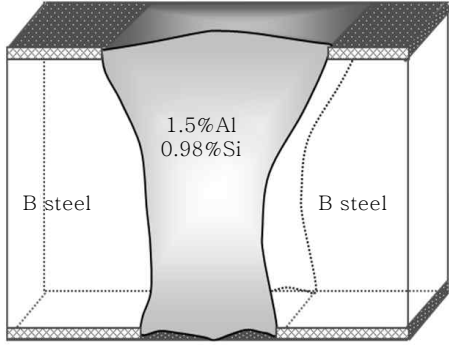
Welded zone of Al-Si coated boron steel
